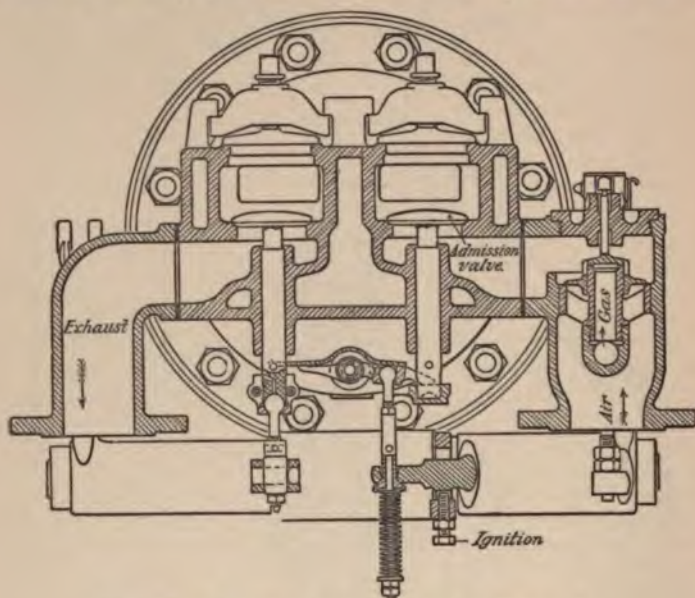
Koerting Engine—End view, Valves, &c.
